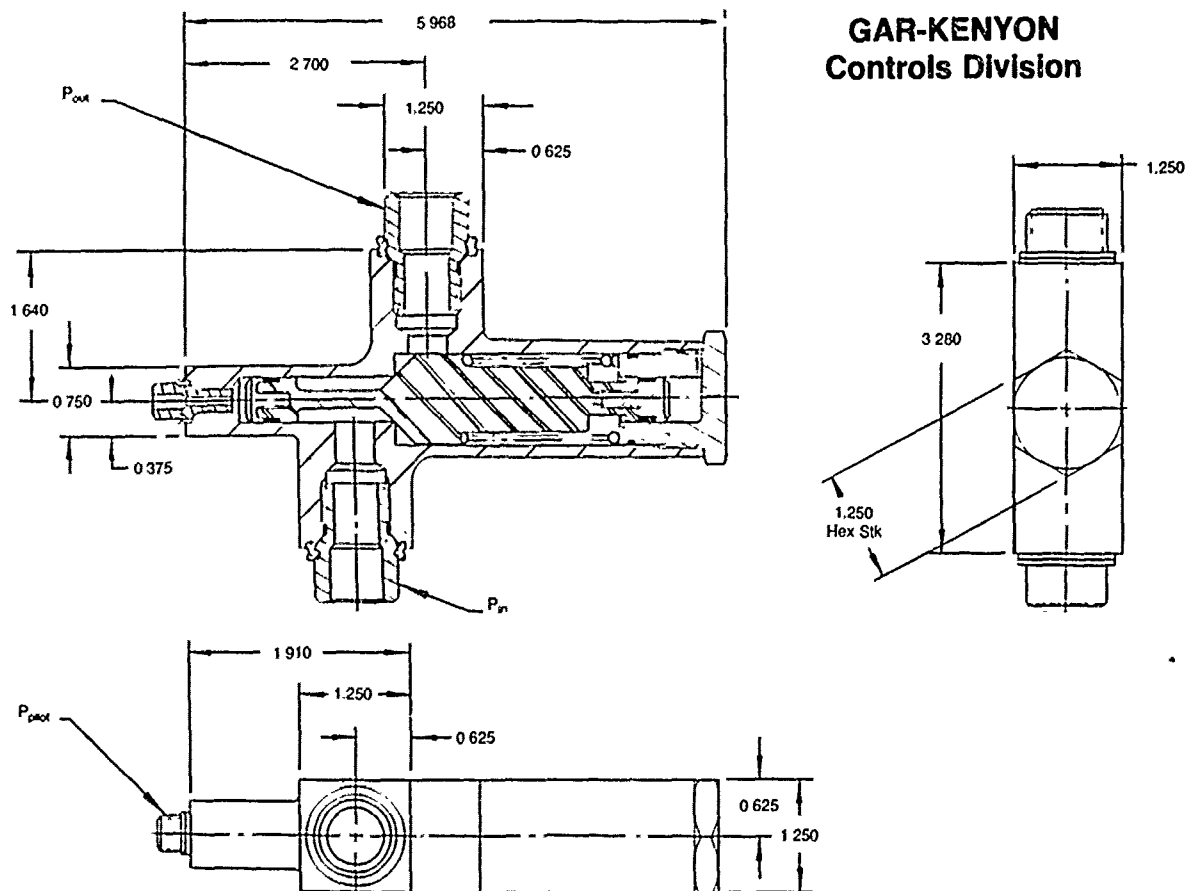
GAR-KENYON - Auxillary RLS Valve Outline/Detail Drawing
